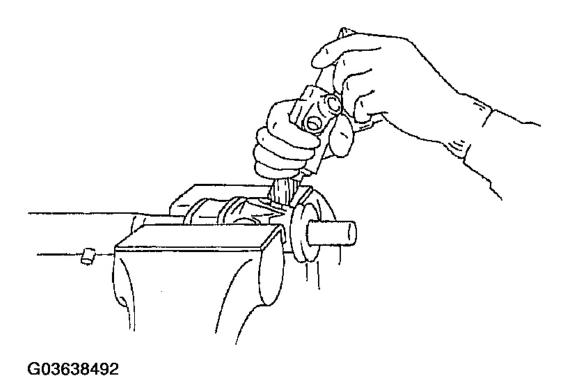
Pulling Out Pinion Shaft And Housing Component Courtesy of MAZDA MOTORS CORP.
